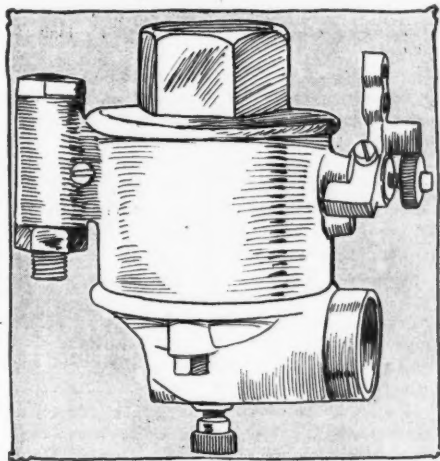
OUTSIDE VIEW OF EIKER CARBURETER
